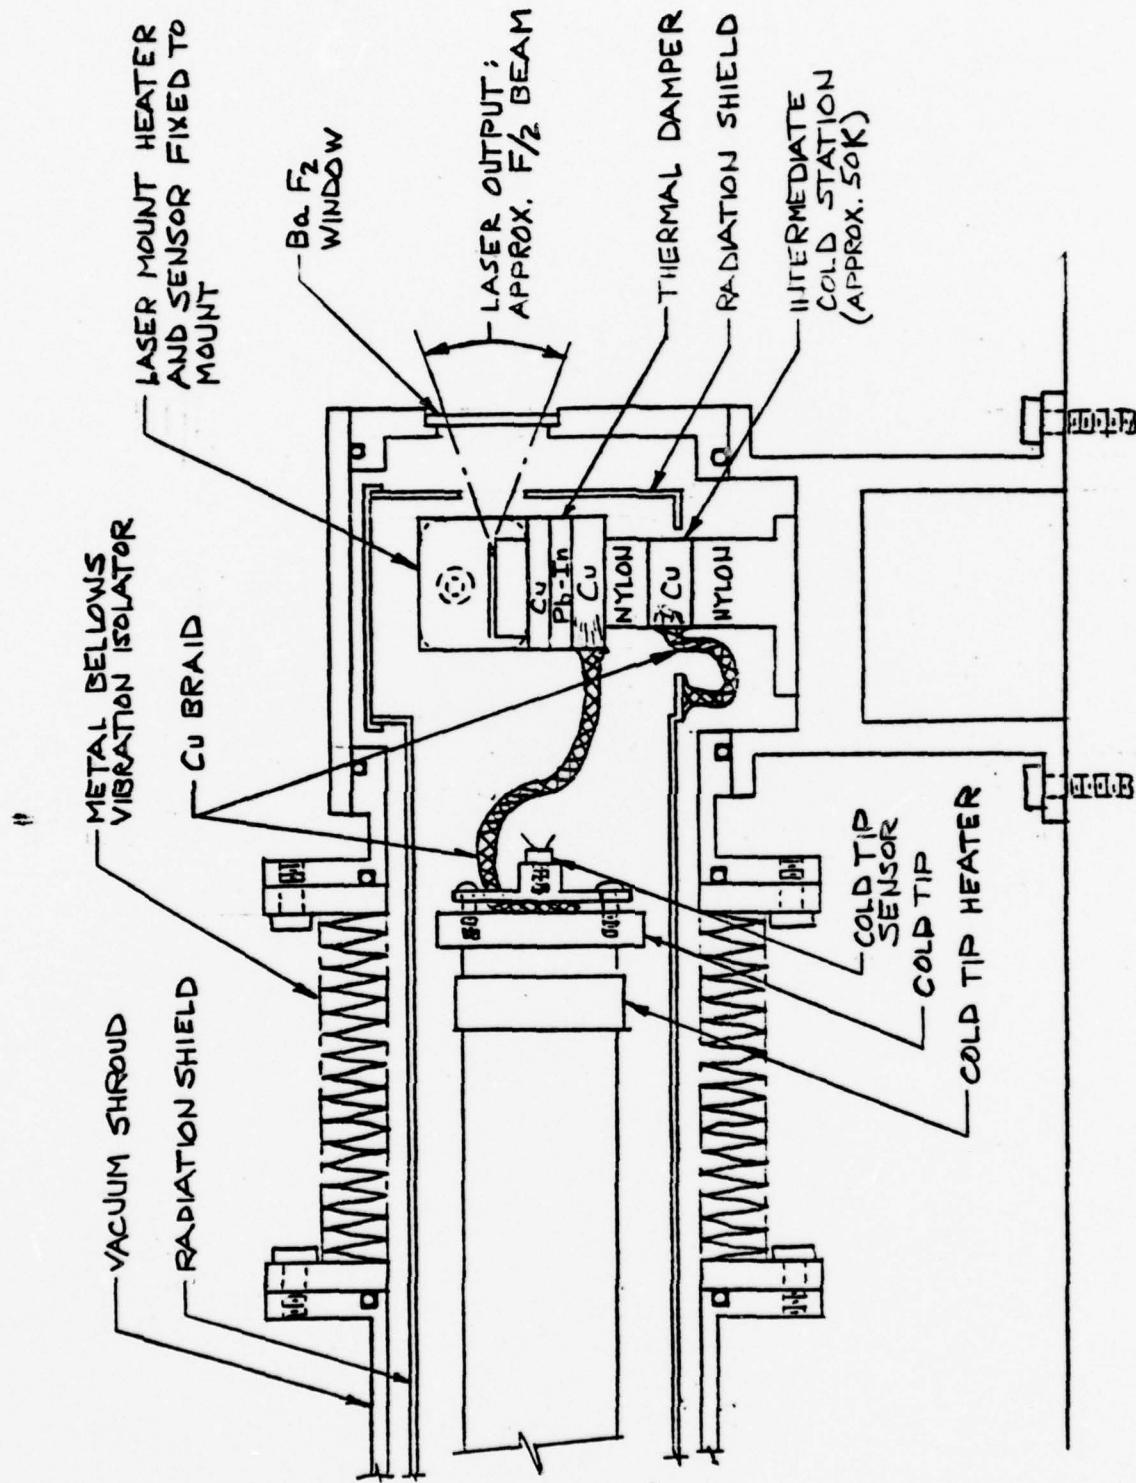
DIODE LASER MOUNTING SCHEME
